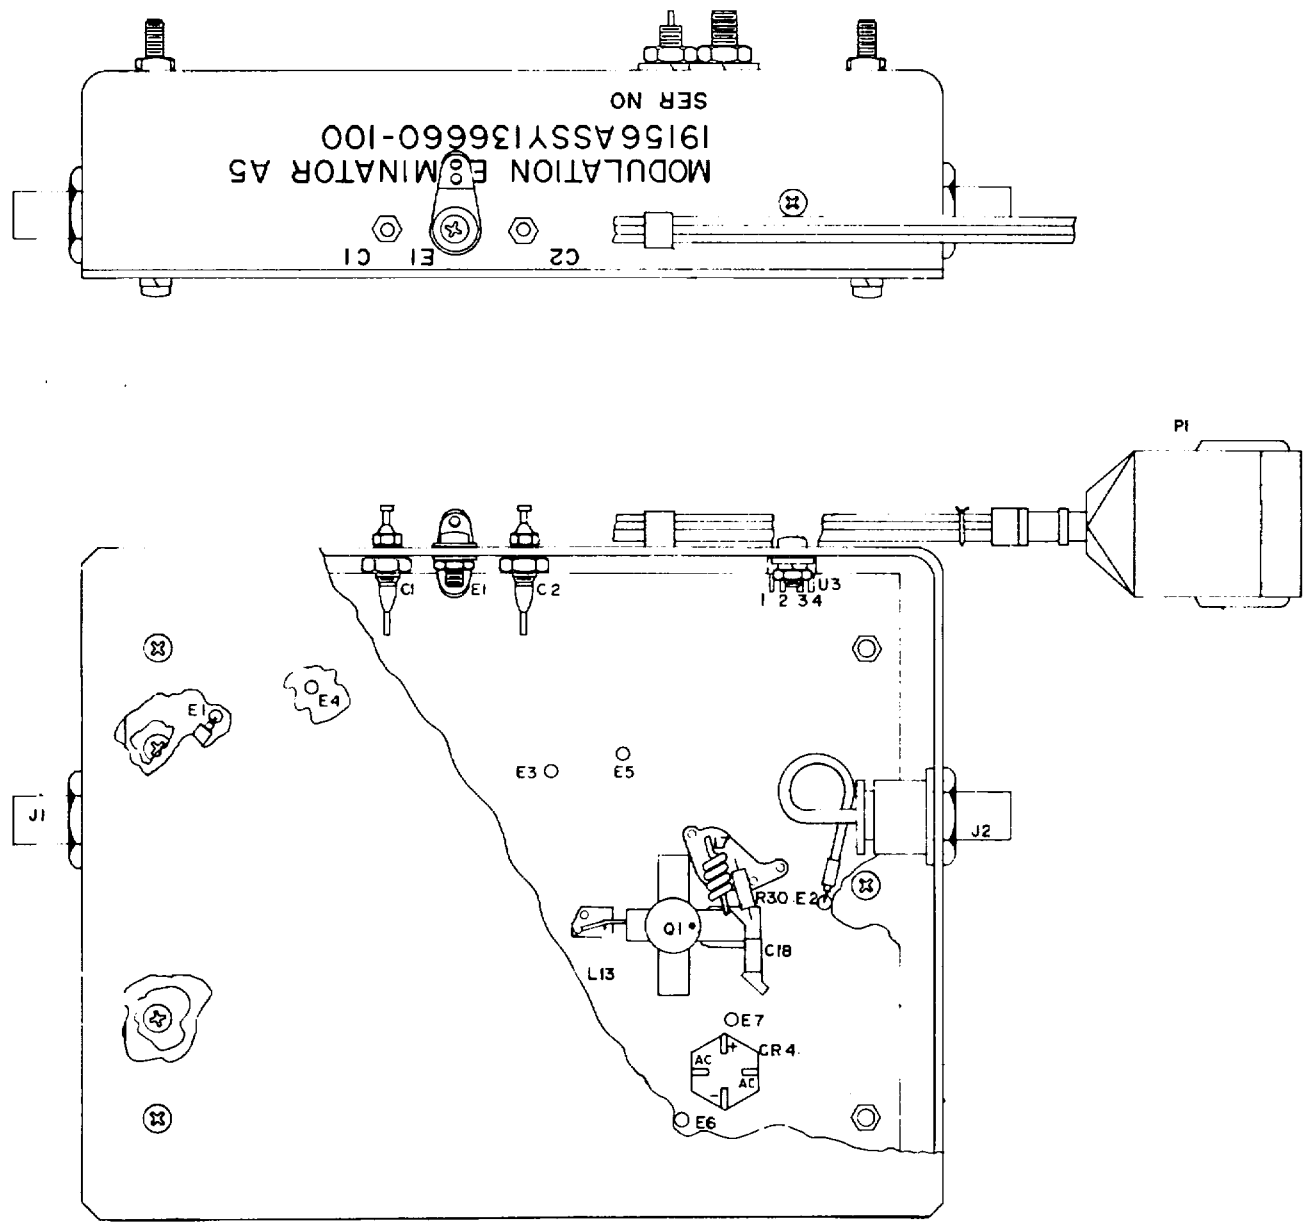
Modulation Eliminator, 1A5A5 Parts Location Diagram
